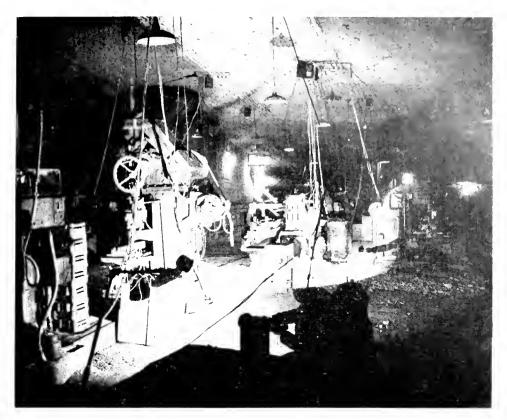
Articulating rod shop, Benten plant at Oya Works.
